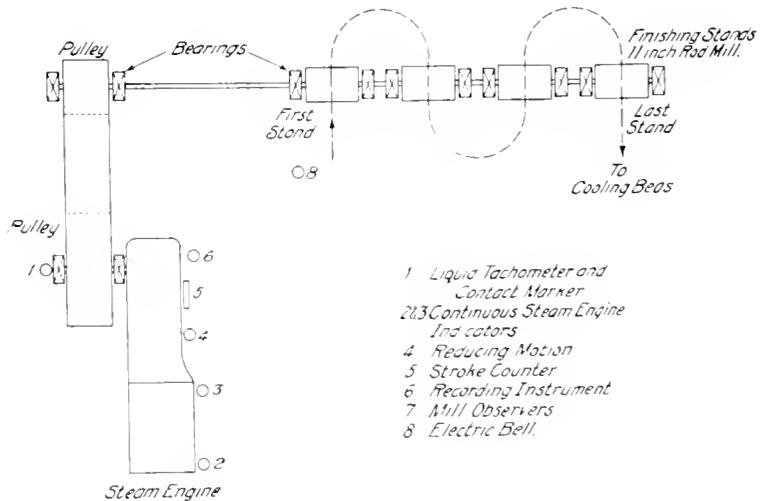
Arrangement of Four Finishing Stands of 11 in. Rod Mill
